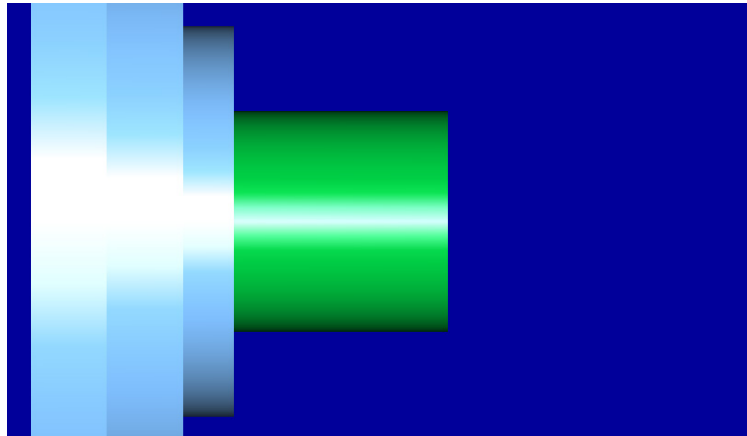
Raw workpiece, in green the metal stock and in light blue the fixture
